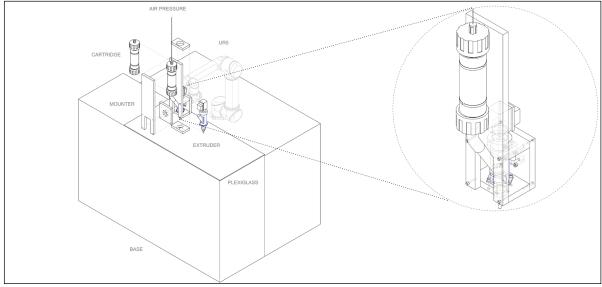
Axonometric view of robotic setup for a UR5 and zoom-in of the mounter + WASP extruder Source: own
